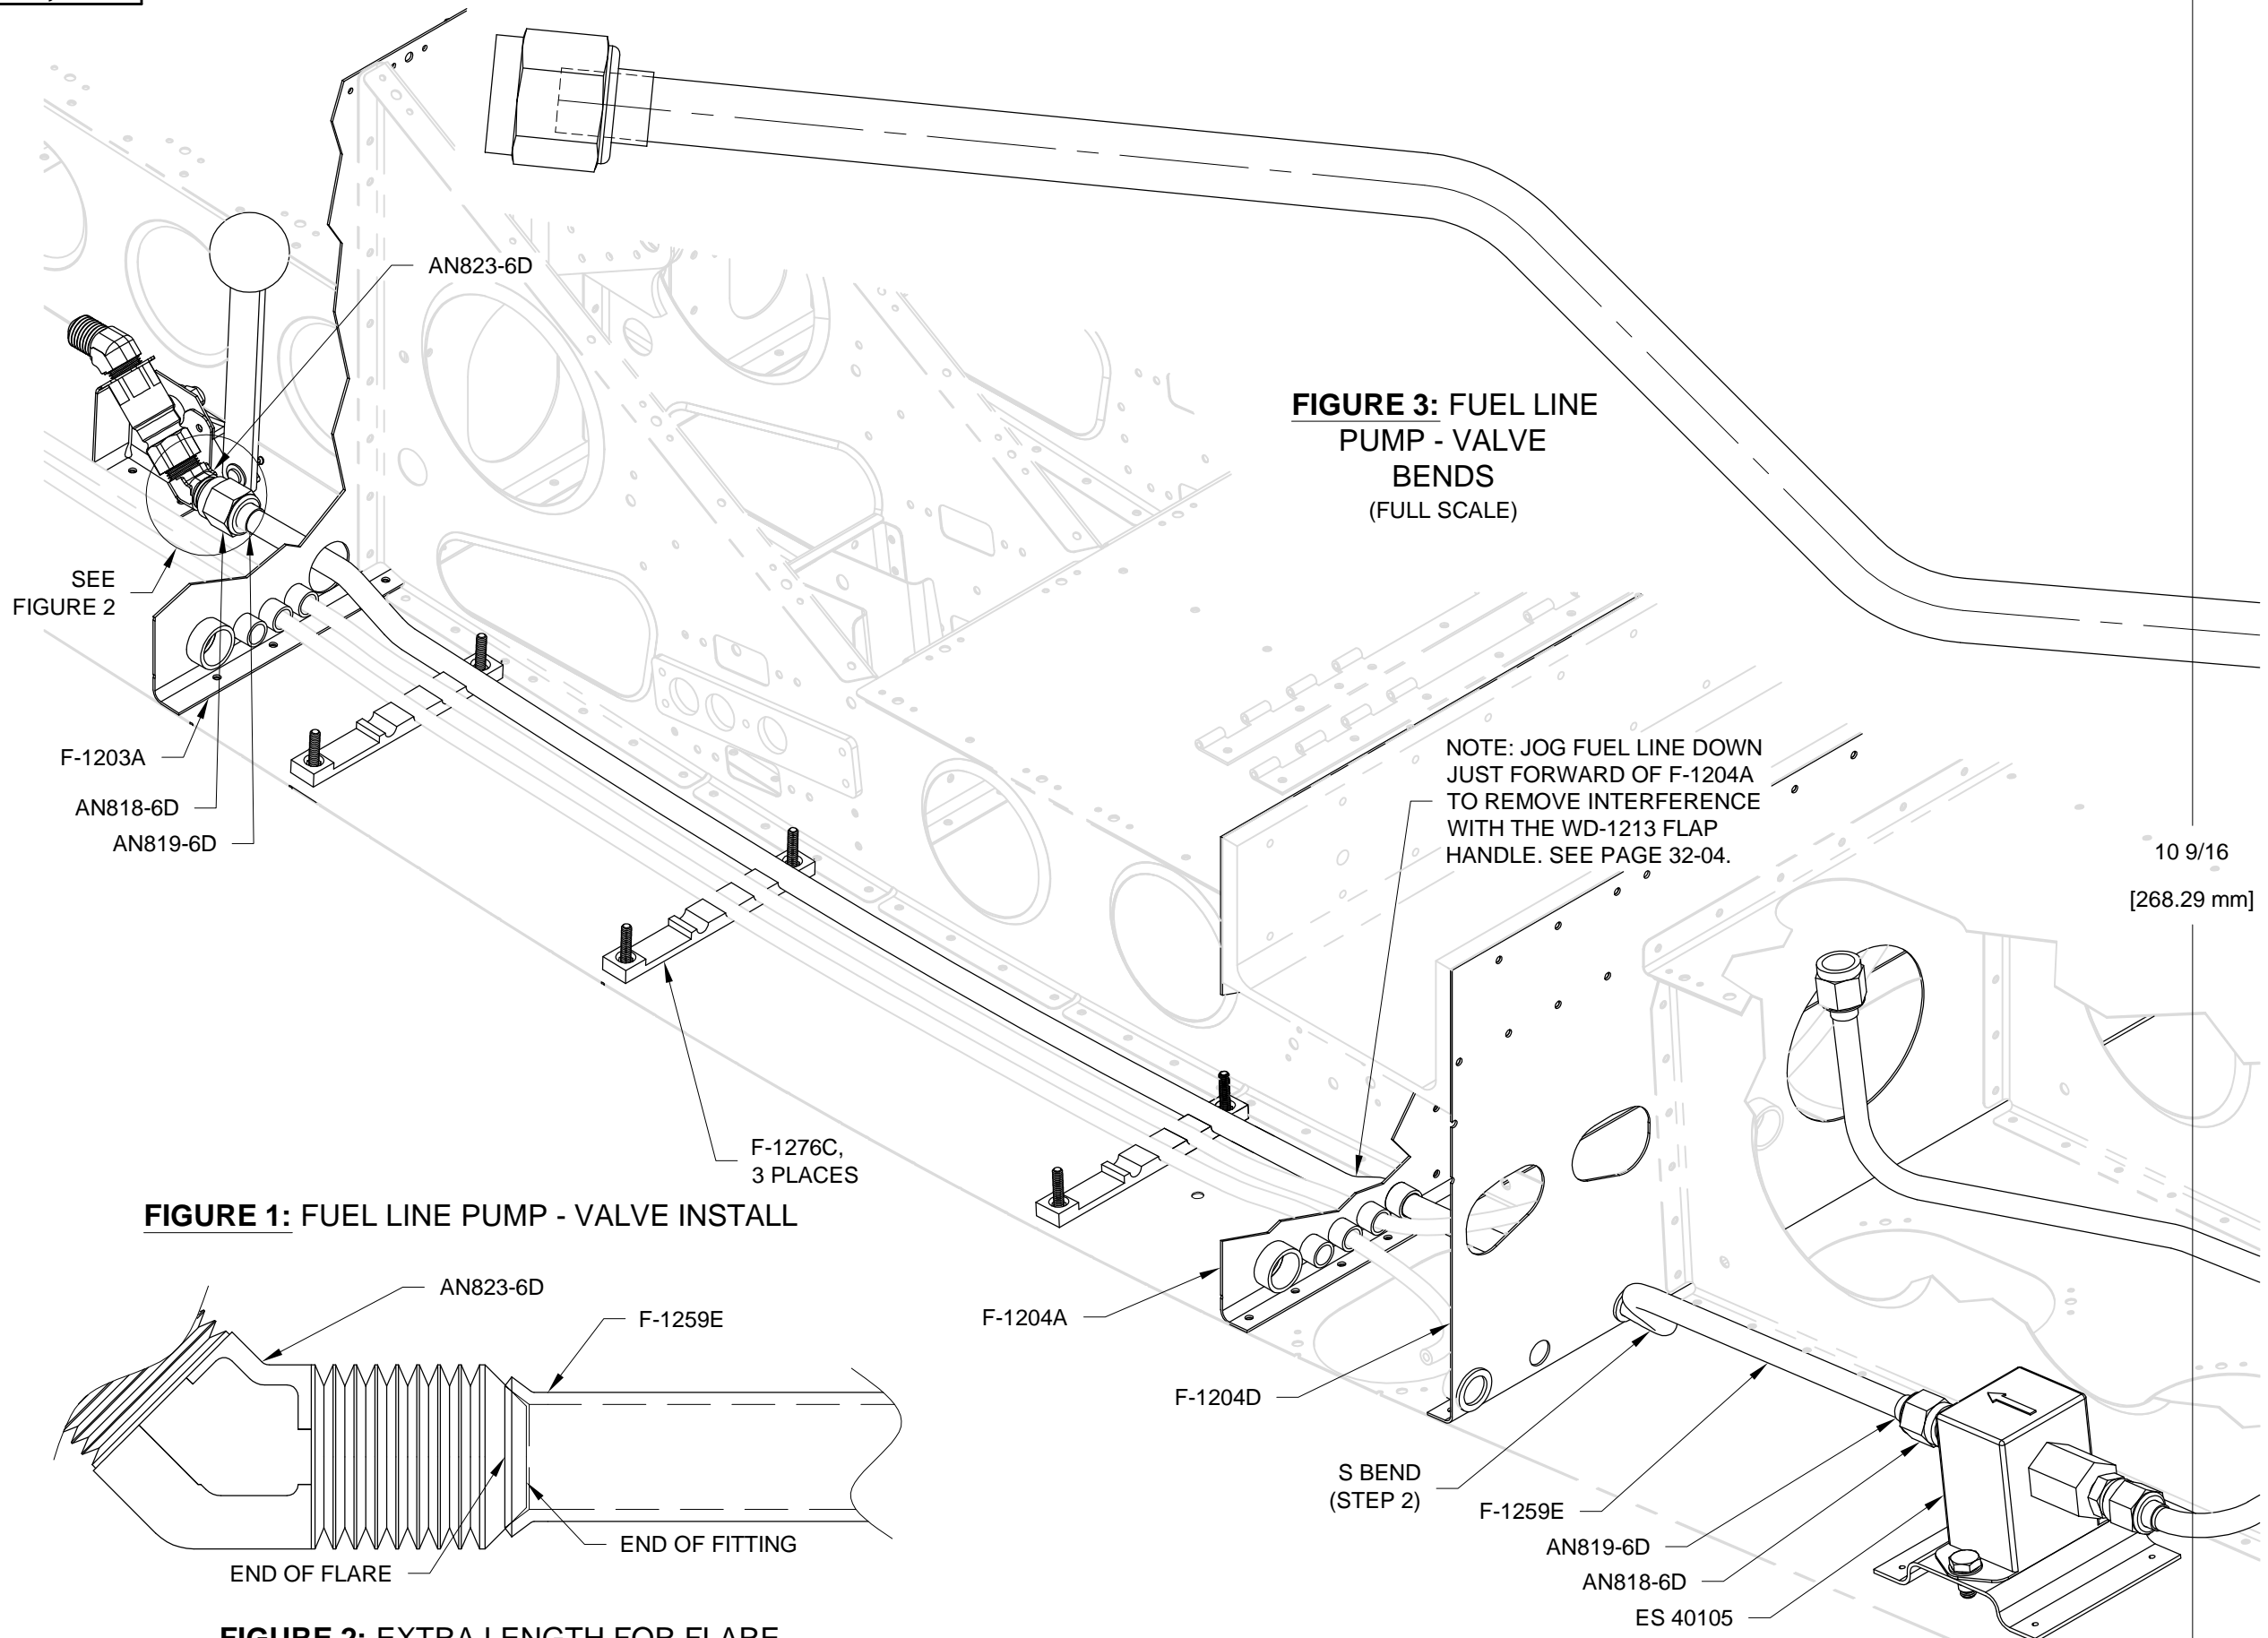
FUEL LINE PUMP - VALVE BENDS (FULL SCALE)
